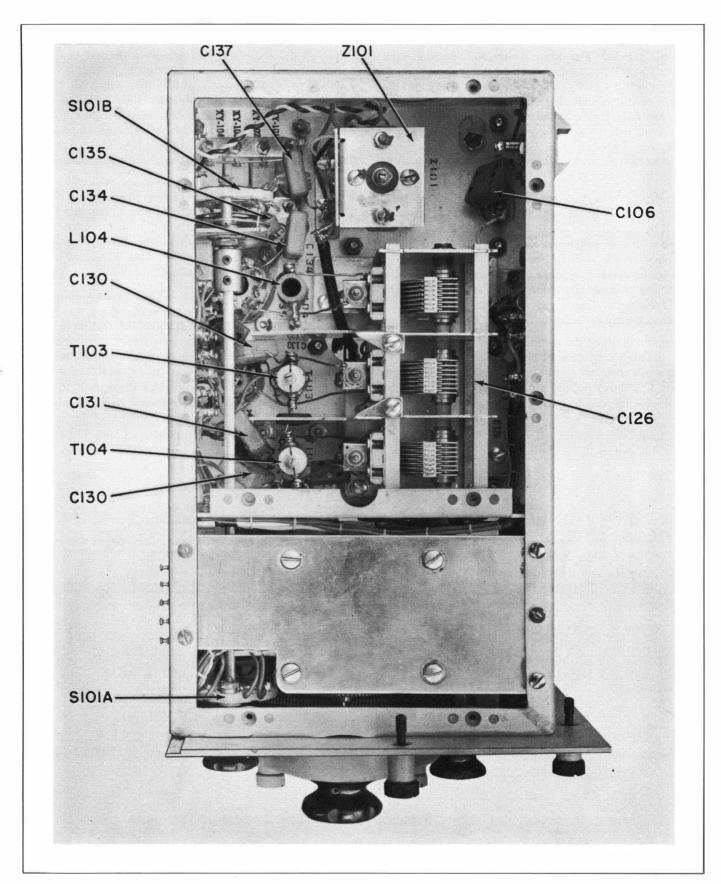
Preselector Unit, Bottom View, Cover Plates Removed
